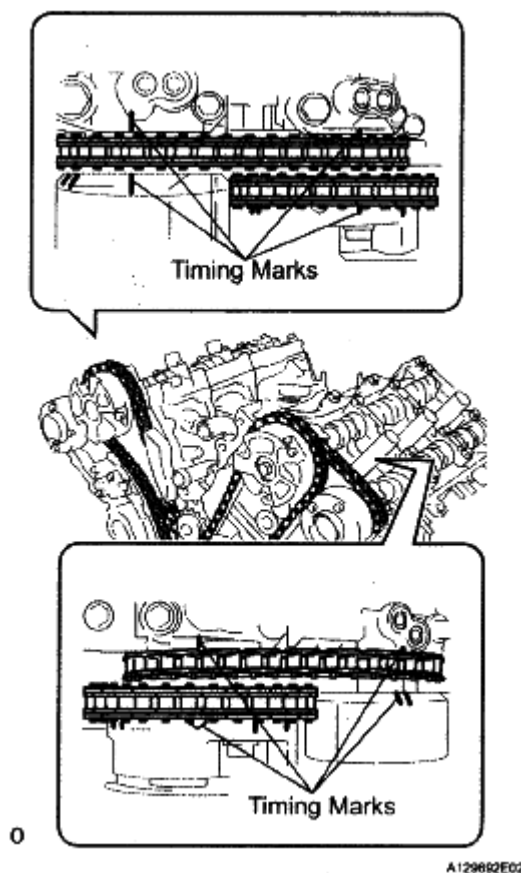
Aligning Camshaft Timing Gears Timing Marks With Bearing Cap
